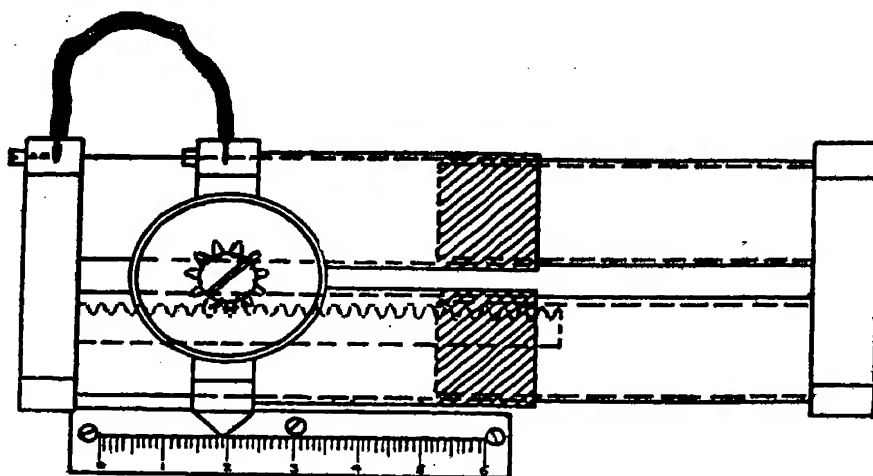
“ Billi ” Condenser, Rack and Pinion Type.
